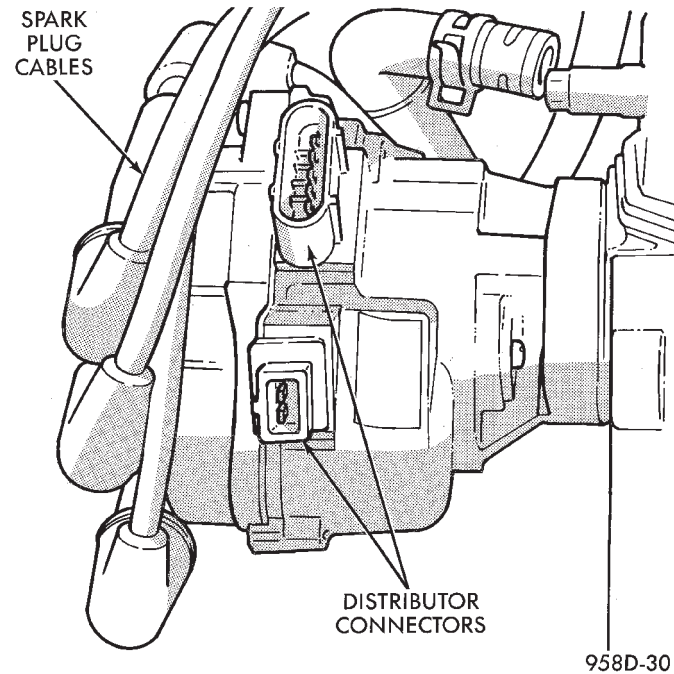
Distributor Electrical Connectors—Viewed From Rear of Distributor
